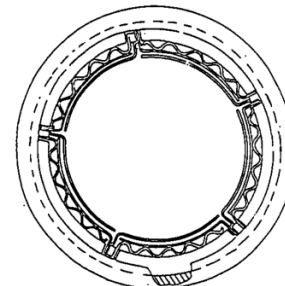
Reversed Multipad Foil Journal Bearing [6]
